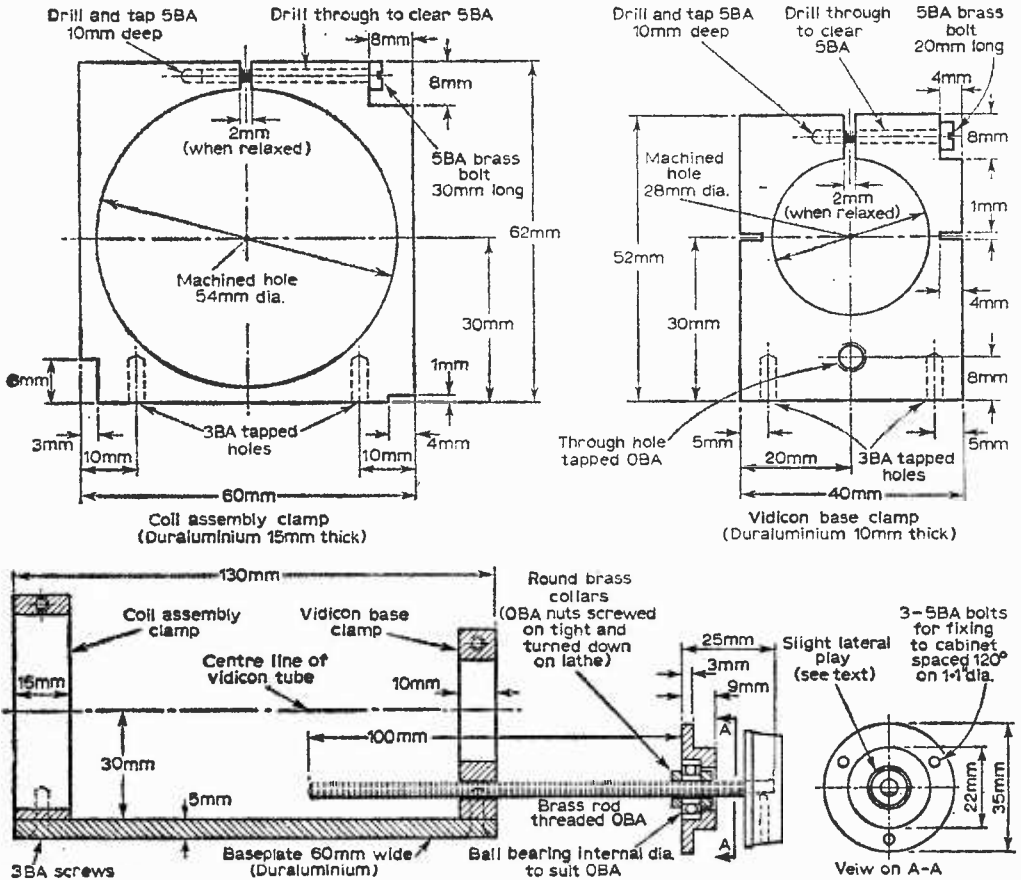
The coil and tube-base clamp blocks for the vidicon, carriage assembly and micrometer transport mechanism of carriage.
